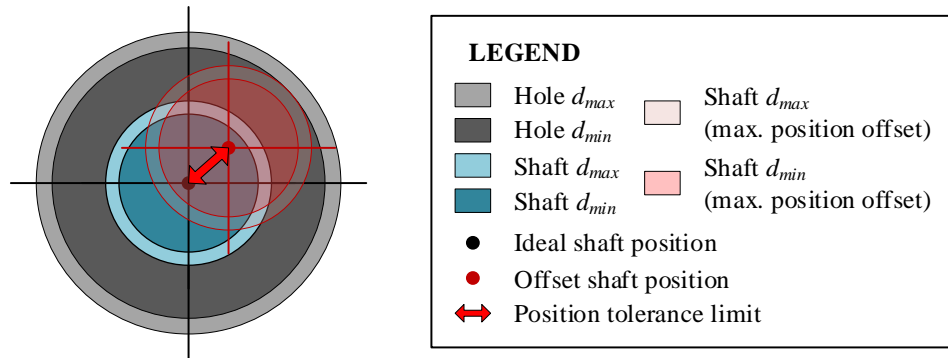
Dowel and bolt positional accuracy tolerance concept
